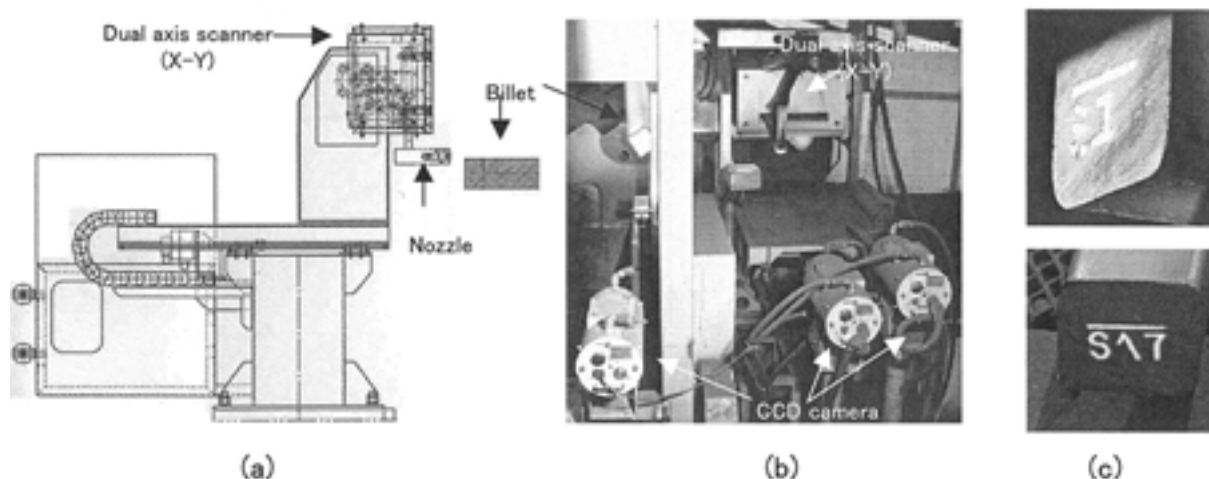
Schematic diagram and appearance of the ID number painting machine with a picture drawn with a single stroke of the brush and examples of marked character: (a) diagram; (b) appearance; (c) examples.
